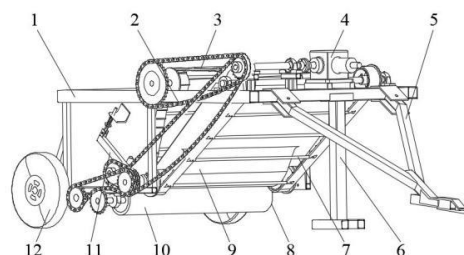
Schematic of the horizontal-shaft roller-type cotton stalk puller structure
